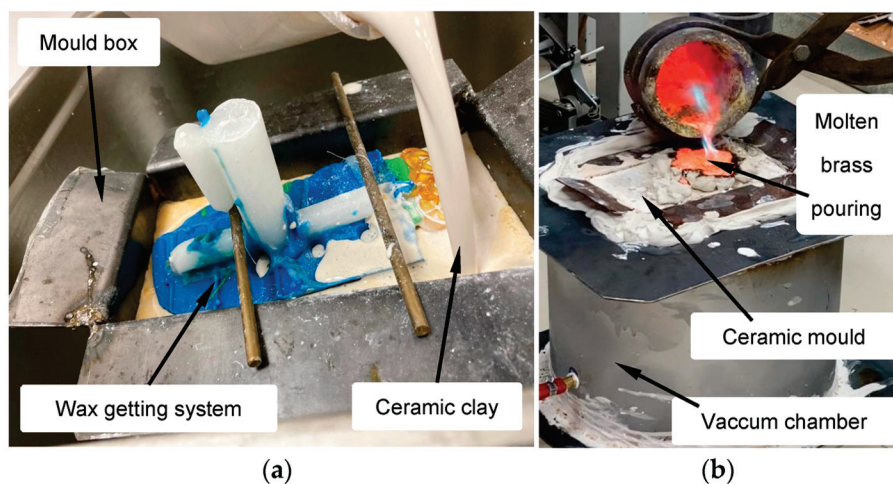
Rapid casting (a) green mould making and (b) pouring of molten material in a ceramic mould.
